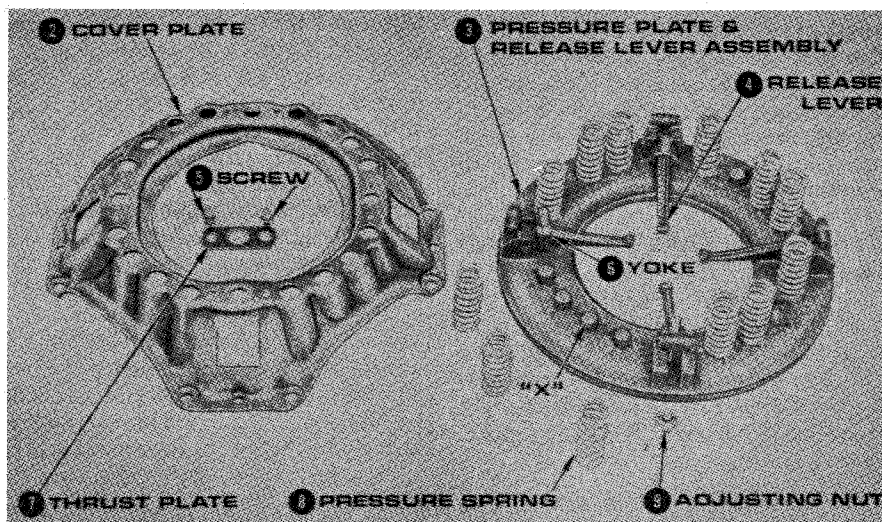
Exploded view of the clutch pressure plate and cover assembly. Note that on 8000, 8600 and 8700 models, second boss ("X") in a clockwise rotation from each release lever is not fitted with a pressure spring. Pressure plate and release levers are serviced as an assembly only.
